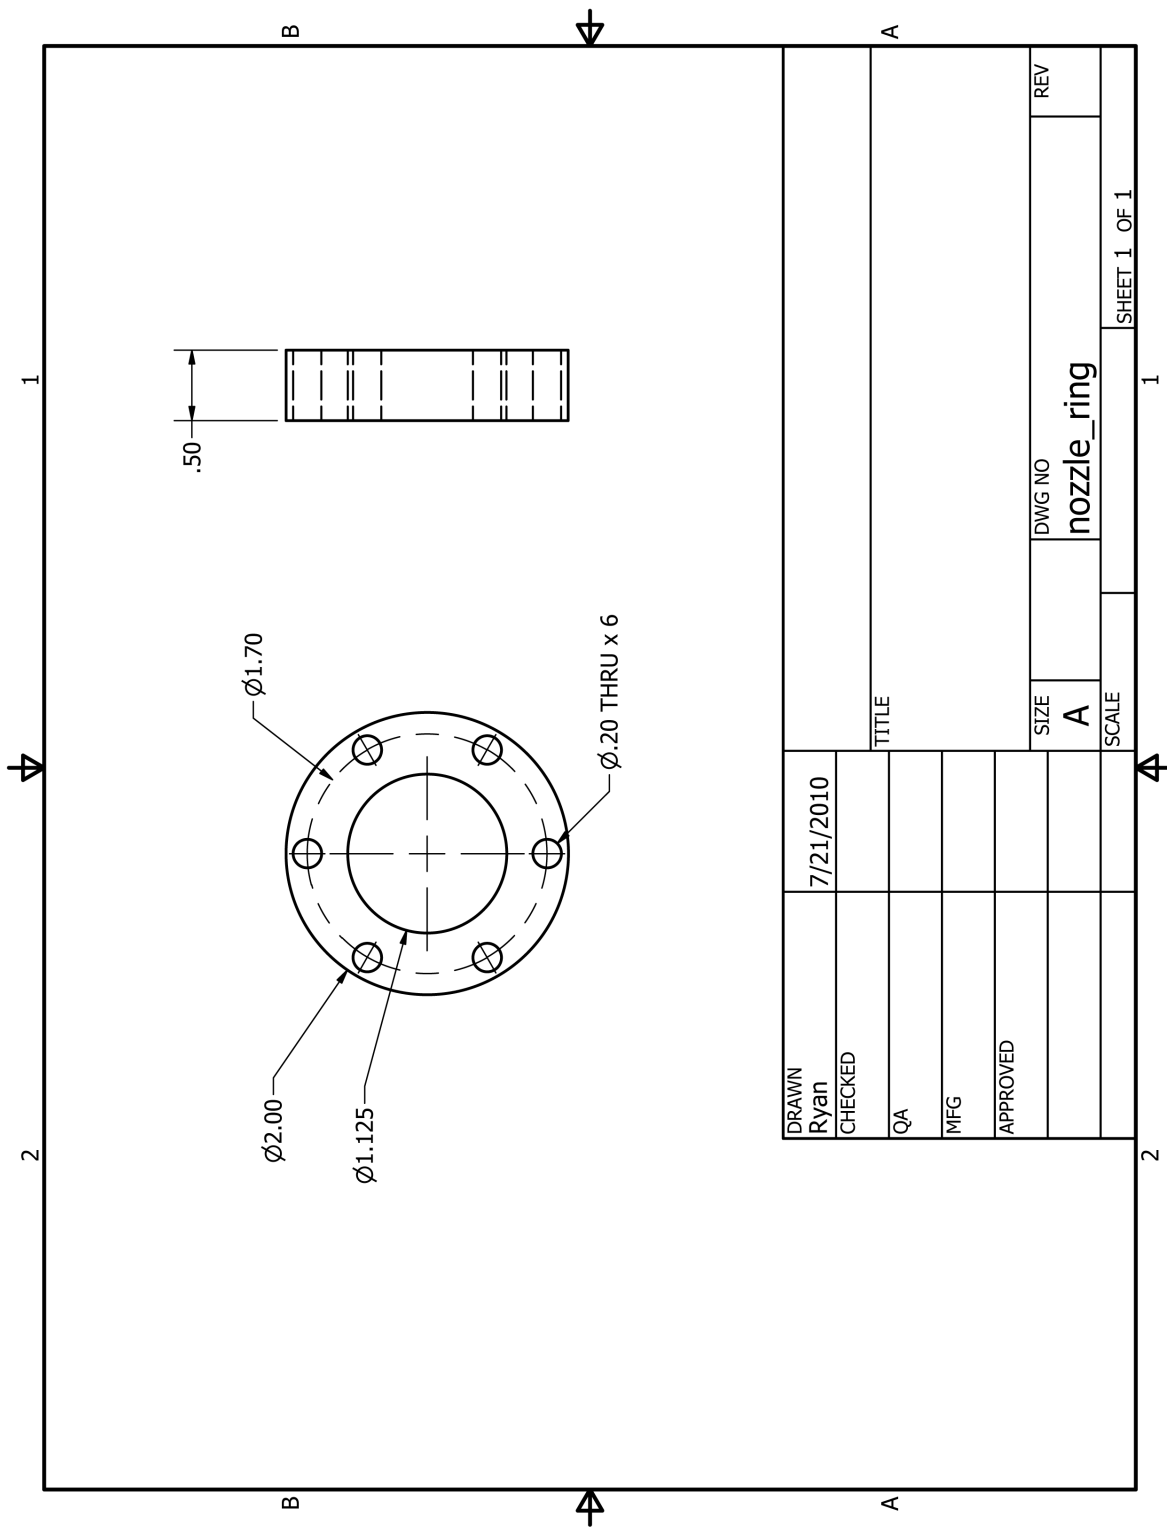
Attachment ring which is soldered to the copper tubing to form nozzles
